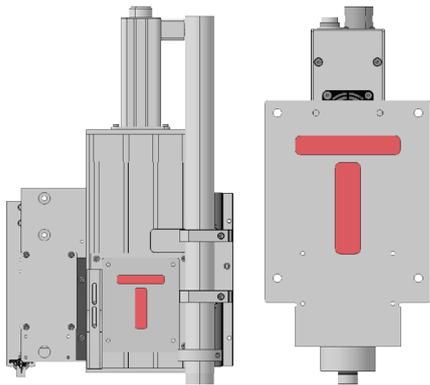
(A) INTAKE ON THE MACHINING UNIT, (B) RECESS ON THE TANGENTIAL CUTTING HEAD (REAR VIEW)
